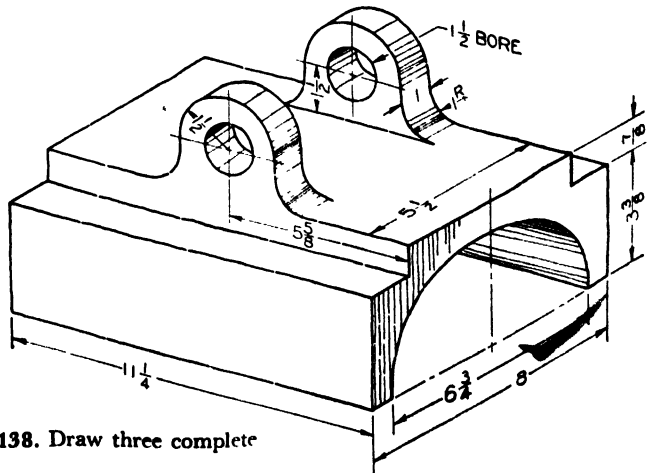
Prob. 138. Draw three complete views of the keeper.
